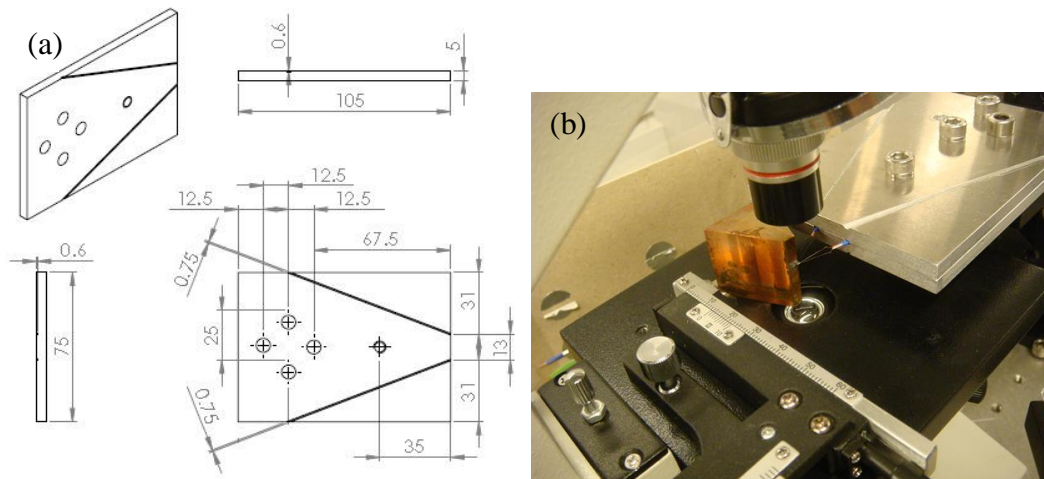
(a) TC fixture drawing (mm) (b) Fixture in use
